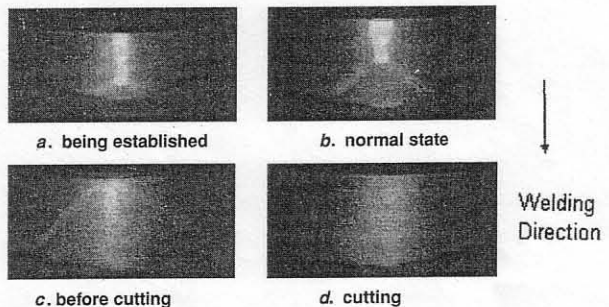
Images of the sensed keyhole weld pool with varied welding current
